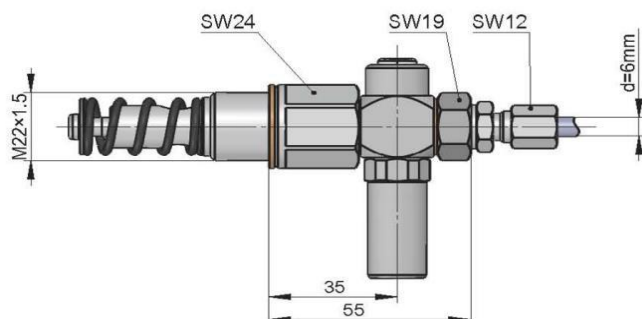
Dimensions PRV-C with mounted pump element PE
